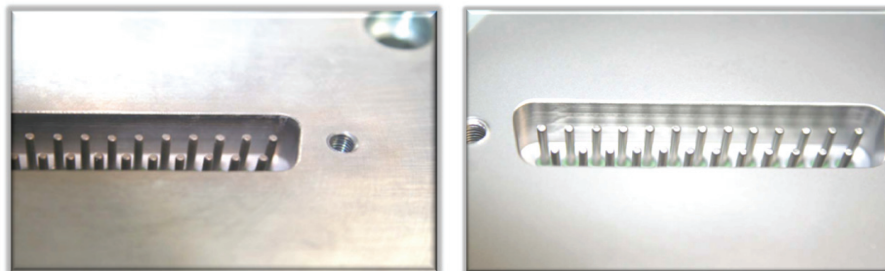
Assembled glass-to-metal feedthrough units: left without tribo finish => interferometric colours are visible due to the oxide layer; right with tribo finish => homogeneous, oxide free, smooth, and clean surfaces.
